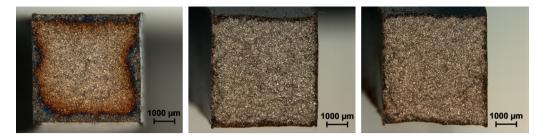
Fractured surfaces of SMC parts heat treated in air at 400, 500 and 600 °C (from left to right).
